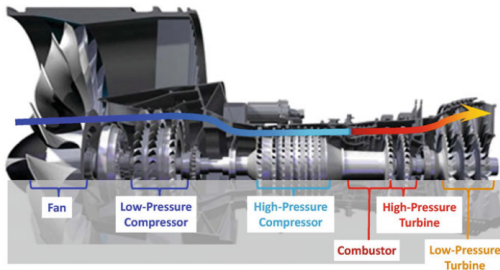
Cutaway drawing of a jet engine produced by Pratt & Whitney. The colored line shows the flow of fluid through the main parts of the engine: compressor, combustor, and turbine. In addition, the color reflects the temperature of that fluid is (with blue representing cooler temperatures and red representing hotter temperatures).
